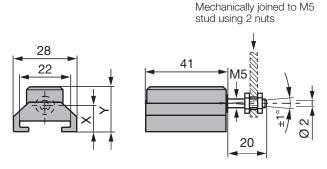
Installation dimensions of BTL5-M/N-2814-1S magnet
